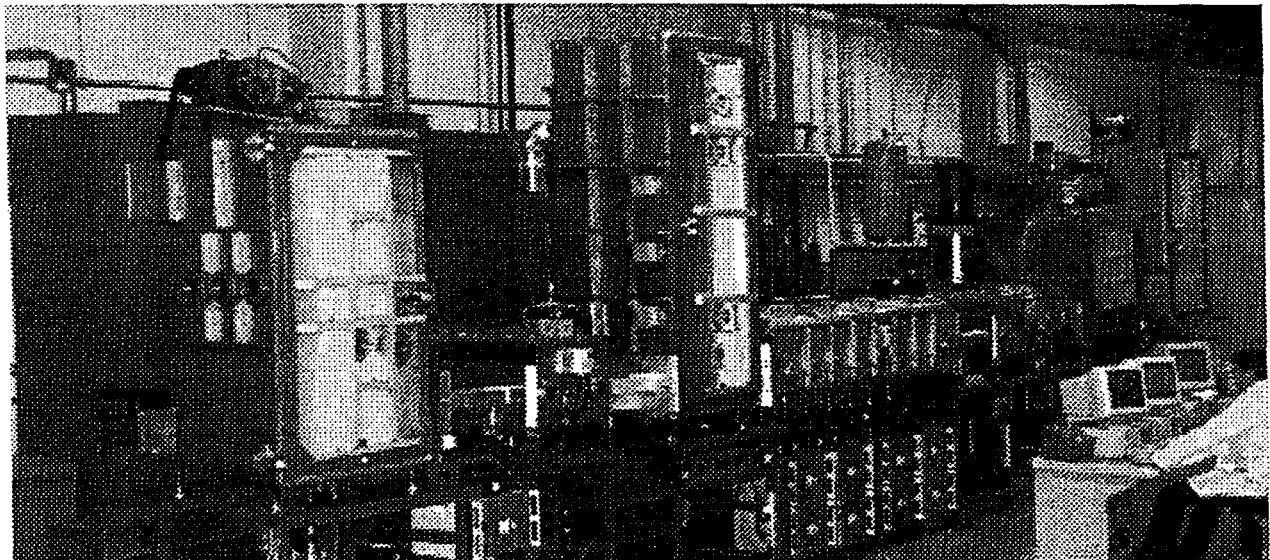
ECD's Multipurpose Continuous Roll-To-Roll A-Si Solar Cell Deposition Machine. The Tallest Chamber Is The Serpentine Deposition Chamber.
